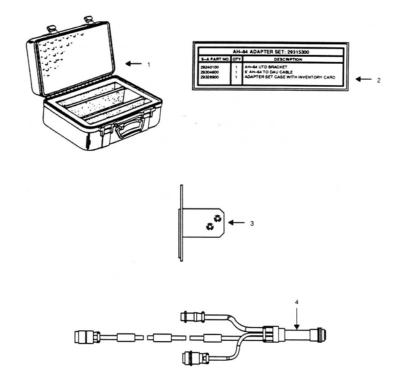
A. AH-64A/C Test Adapter Kit (29315300)
